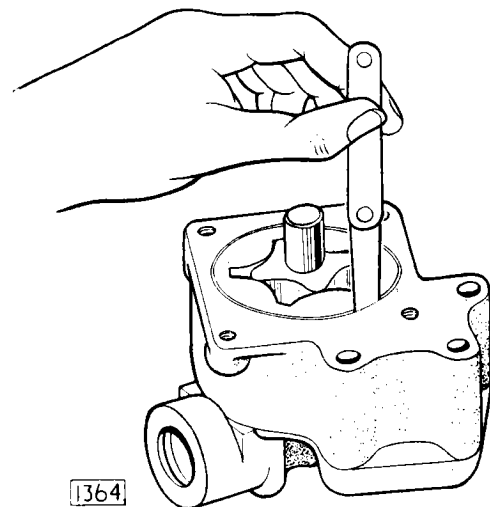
Measuring the clearance between the outer rotor and the pump body.
